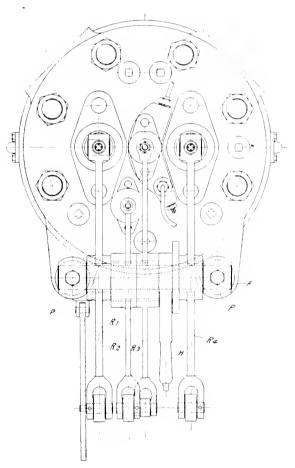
Plan View of the Valve Gear shown in Fig. 6
